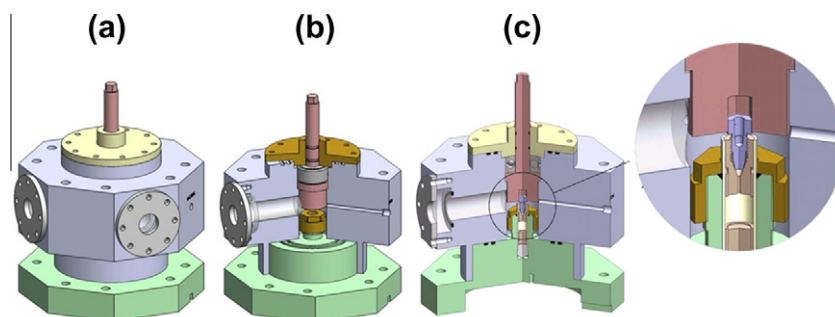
The high-pressure rotor loading/reaction chamber. (a) External view of the device; (b) dissection view of the rotation mechanism for sealing the high-pressure rotor (top plate of the chamber); and the mechanism for tightly holding the rotor (bottom plate of the chamber); (c) a highlight of the mechanism used for *in situ* closing and opening the valve inside the high-pressure MAS rotor.
